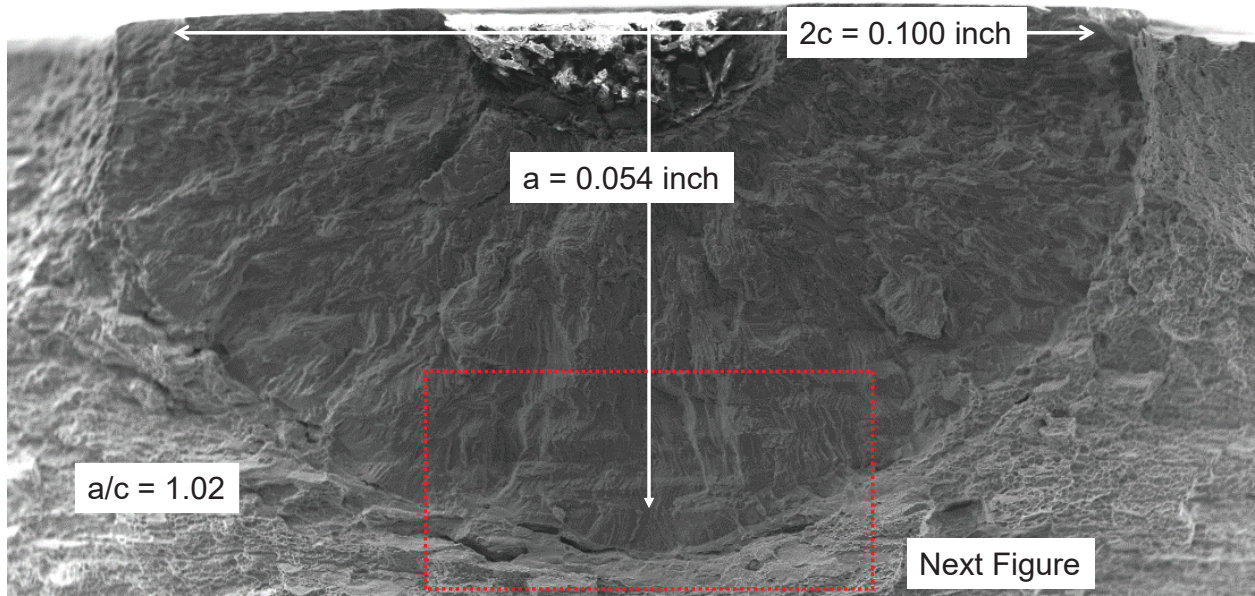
Fracture surface of the LEFM-only test UL-P0-06 (LEFM: -40,000 psi to 30,000 psi).
